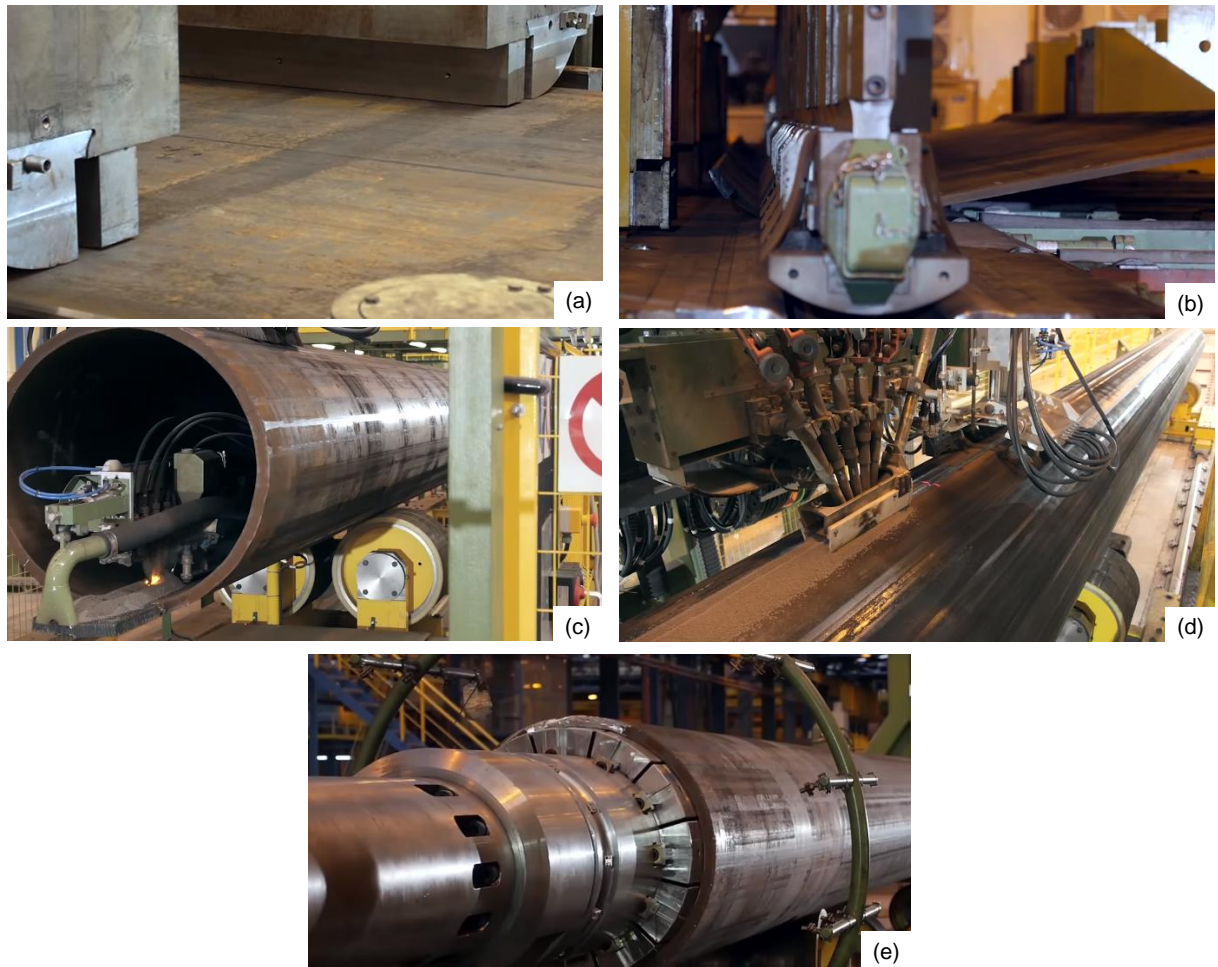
JCO-E pipe manufactured in Corinth Pipeworks S.A. facilities (Thisvi, Greece); (a) Crimping press, (b) JCO press, (c) Inside welding process, (d) Outside welding process, (e) Mechanical expander.
